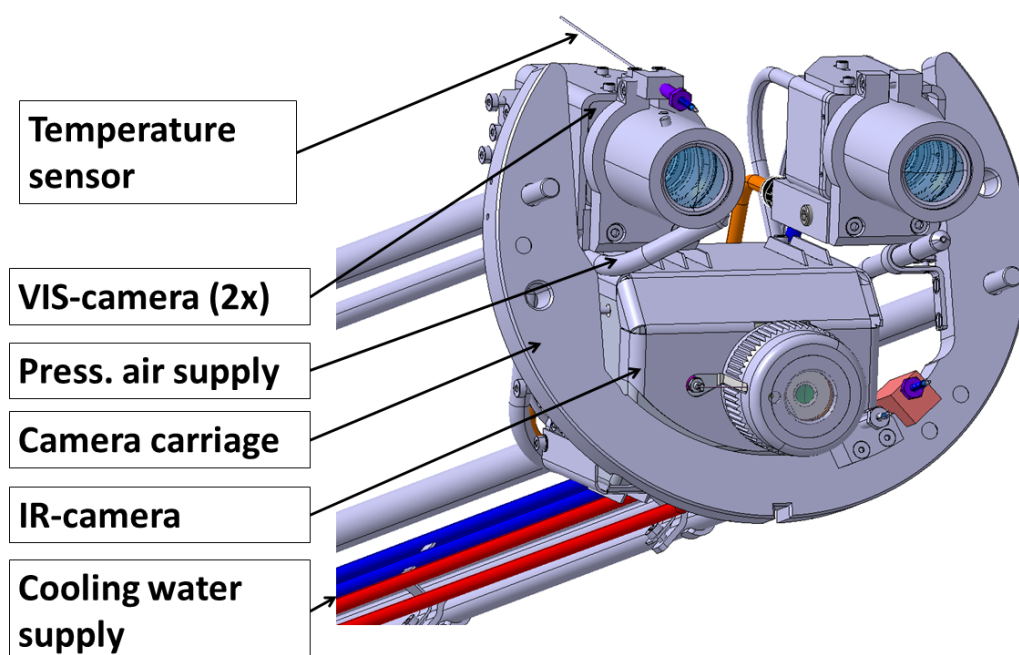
Hardened camera assembly in camera carriage. Cameras equipped with ECRH reflector sheets and water cooled heat sinks assembled in the camera carriage with air and water cooling (red/blue) infrastructure.
